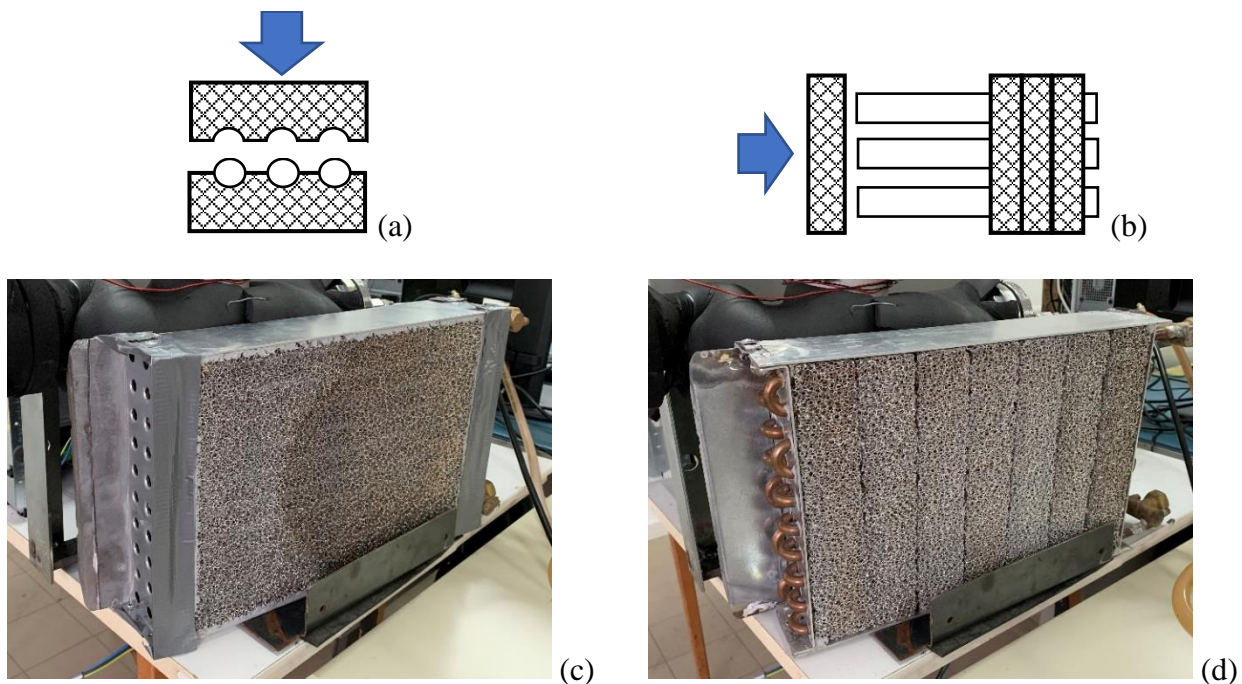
Metal foam water-to-air heat exchangers built with “sandwich packaging” (S-type) (a, c) and “kebab packaging” (K-type) (b, d).
